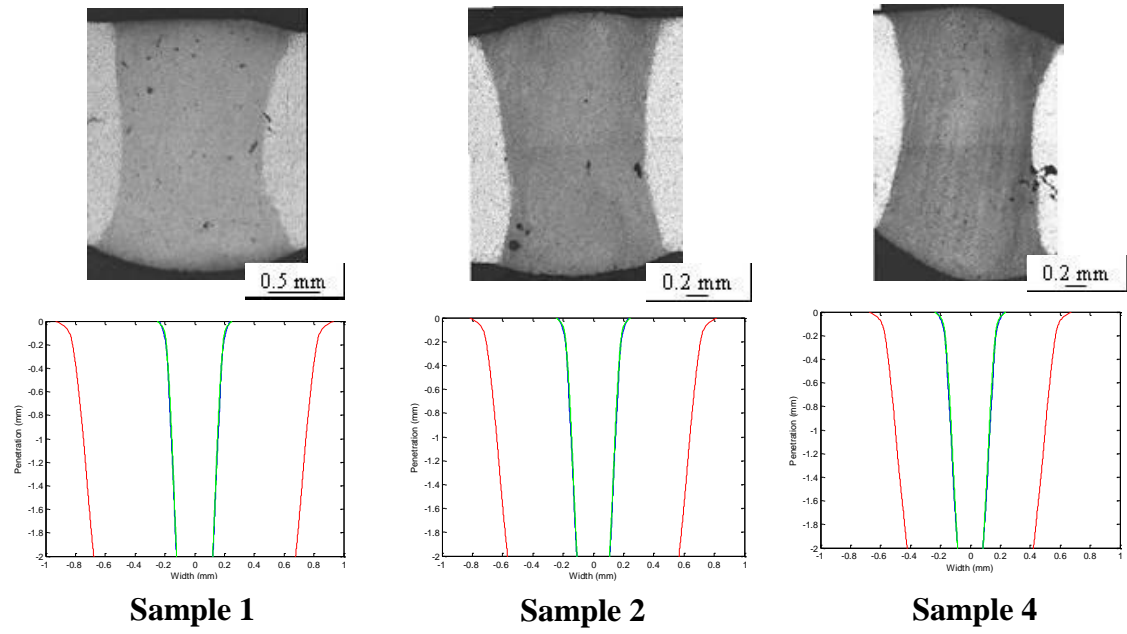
Comparison between Experimental and Calculated Weld Geometry the Model Showing the Effect of Welding Speed on Laser Welding of the 2 mm Plates
